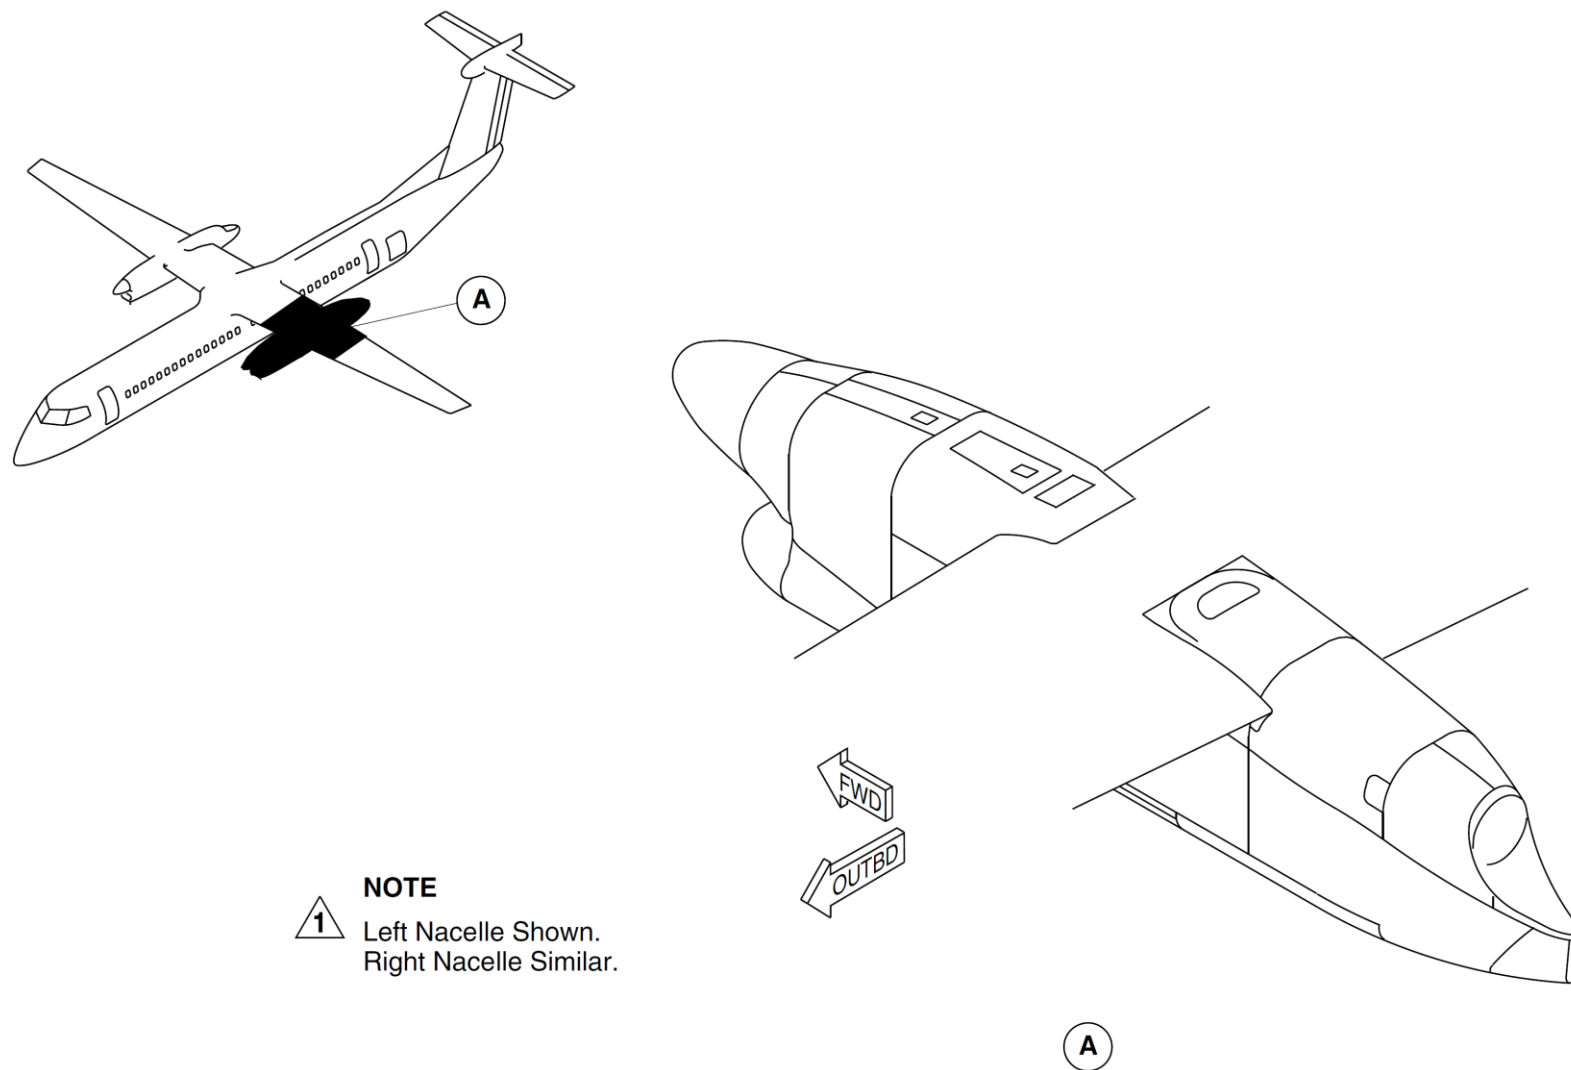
Aft Nacelle Fairings and Surfaces - Location
